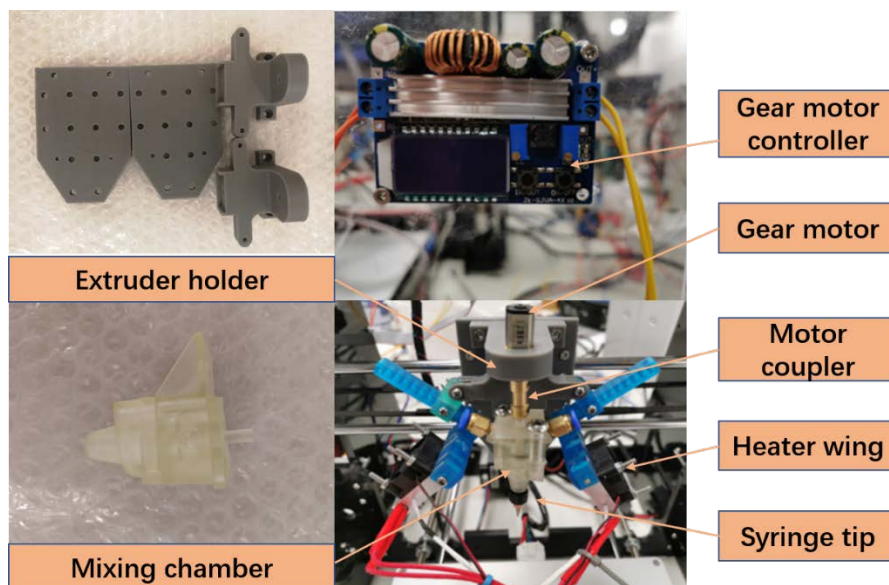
Silicone extruder parts and final assembled extruding mechanism
